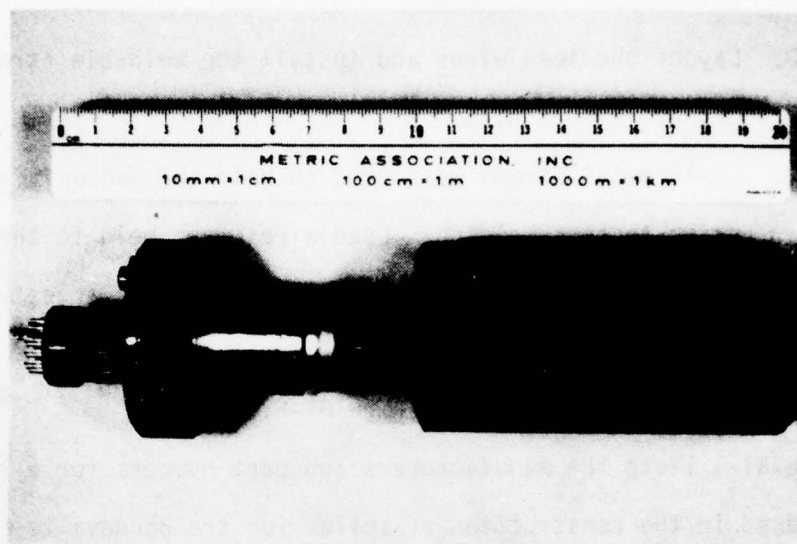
Alignment Jig Used to Position Receptacle after Setting Retaining Ring
